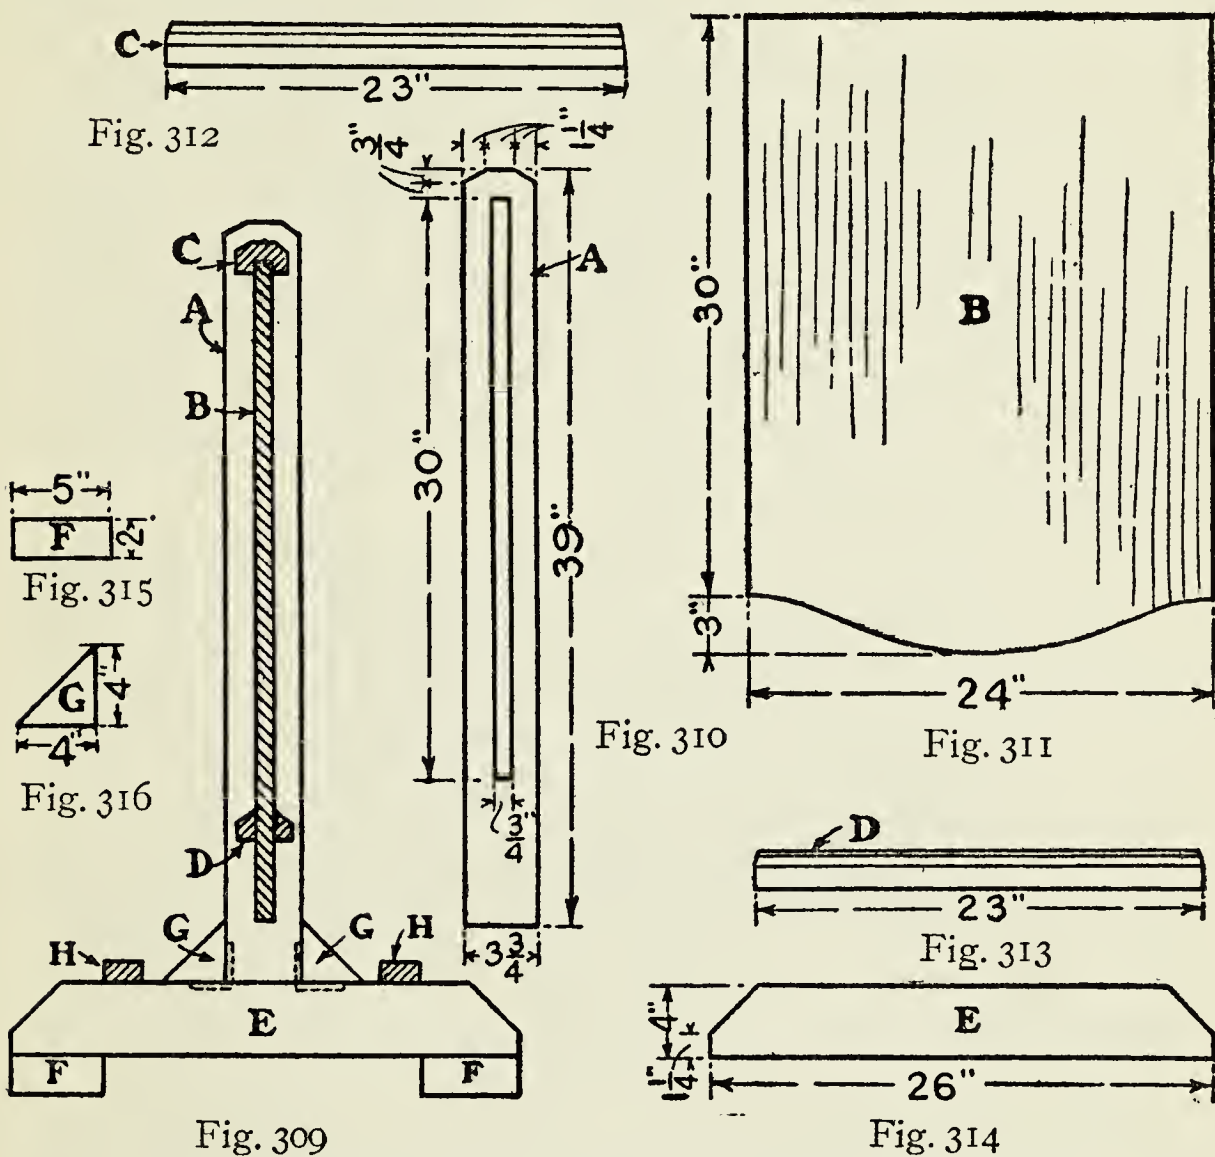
CROSS-SECTION OF PORTABLE BULLETIN BOARD
